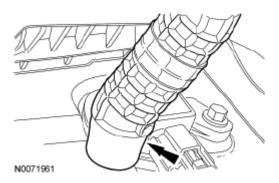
Locating PCV Hose Courtesy of FORD MOTOR CO.
